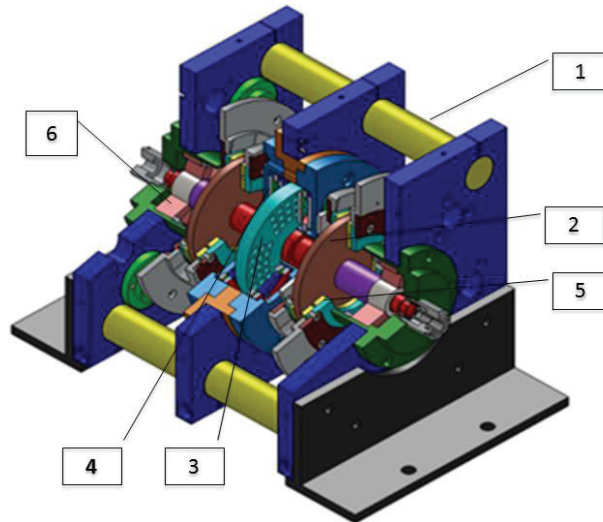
3 Isometric view of the test rig. 1) Test rig's structure; 2) EDB conductor disc; 3) Electric motor disc; 4) Electric motor windings; 5) EDB statoric magnetic circuit; 6) AMD.
